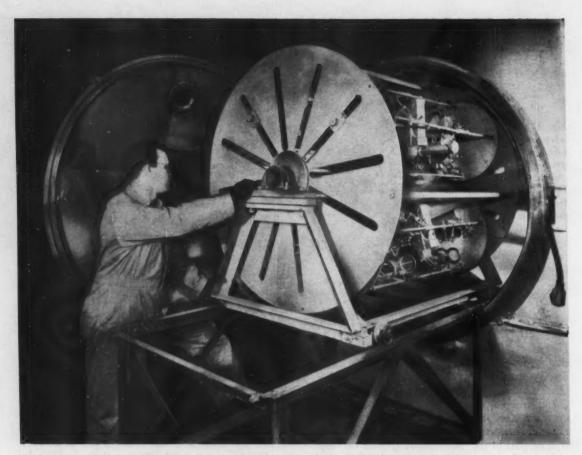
A planetary carriage loaded with sand-blasted wing-tank ejector cylinders goes into the vacuum chamber. The circular door (behind the operator) will be closed and sealed. Vacuum pump-down will begin with the fixture cages spinning within the larger revolving carriage throughout the cycle.
